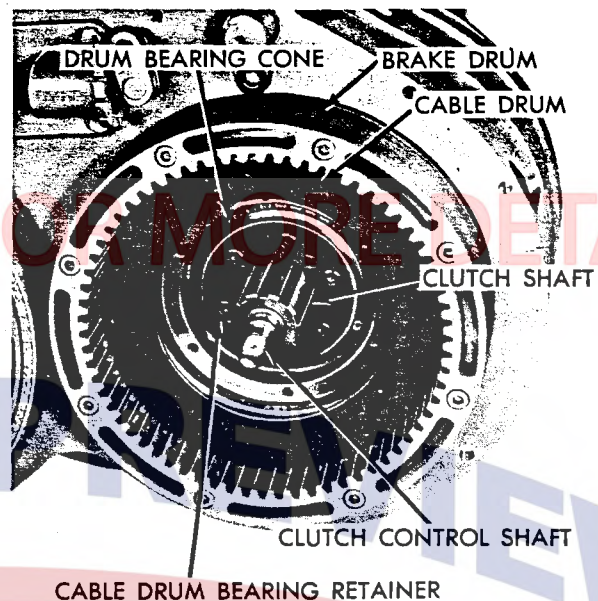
Cable Drum Bearing Retainer - Installed (T-16212)
